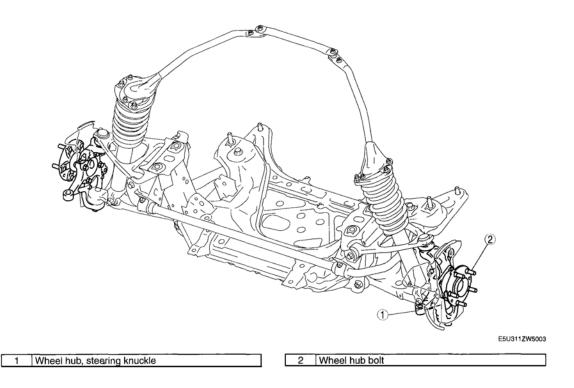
Identifying Front Axle Assembly Courtesy of MAZDA MOTORS CORP.
